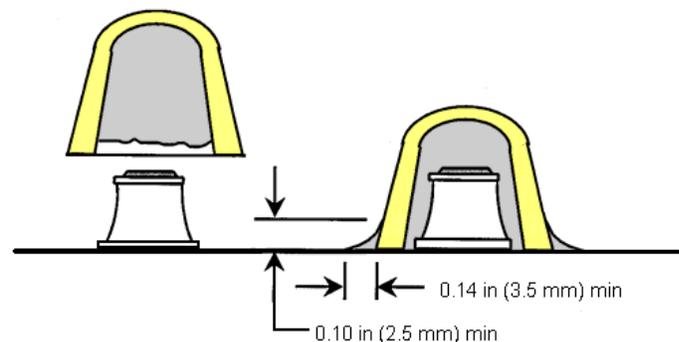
PRE-MOLDED AND ALUMINUM SEAL CAPS
